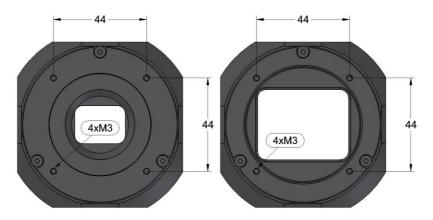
M3 threaded holes, used to mount the EFW, on the C1+ and C1× camera heads
